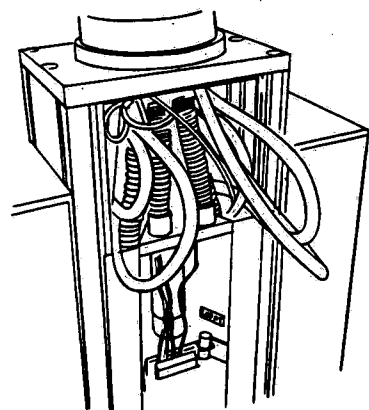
Support Head Assembly - Front View Showing Gas Lines Protruding
